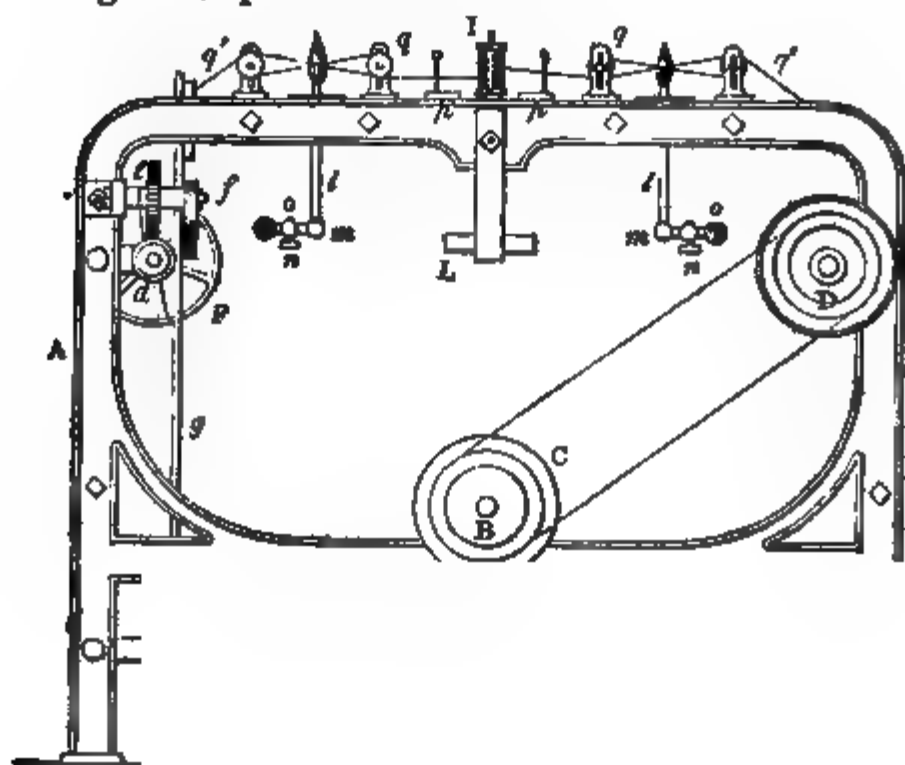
Thread Singeing or Gassing Machine. End view.
